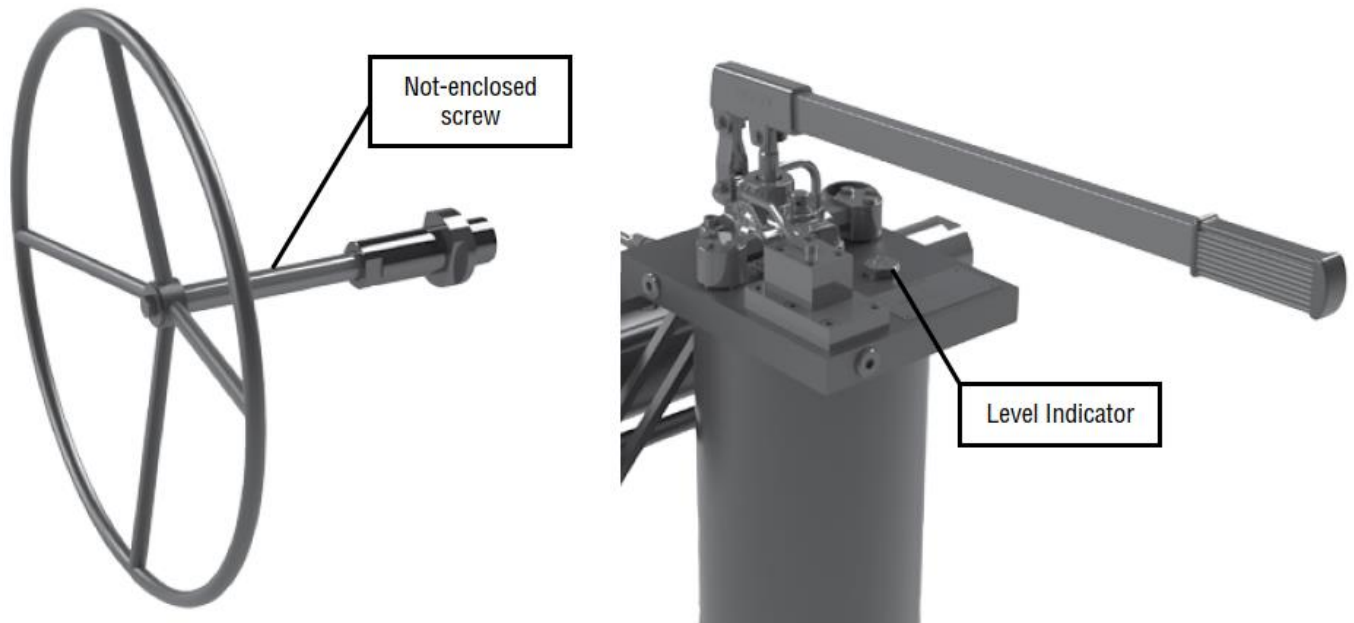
Detail of Not-Enclosed Jackscrew and Hand Pump Assembly
